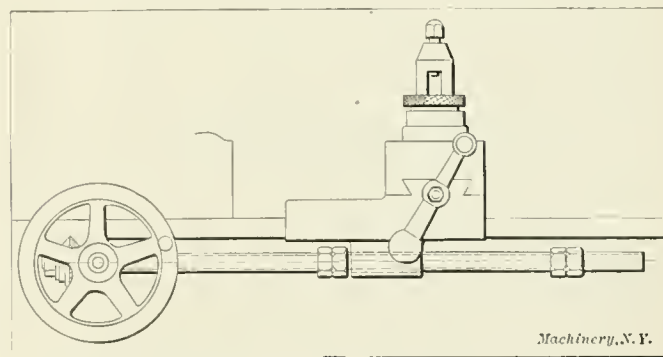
Stop-rod passing through a Hole in a Turret Lathe Cross-slide
